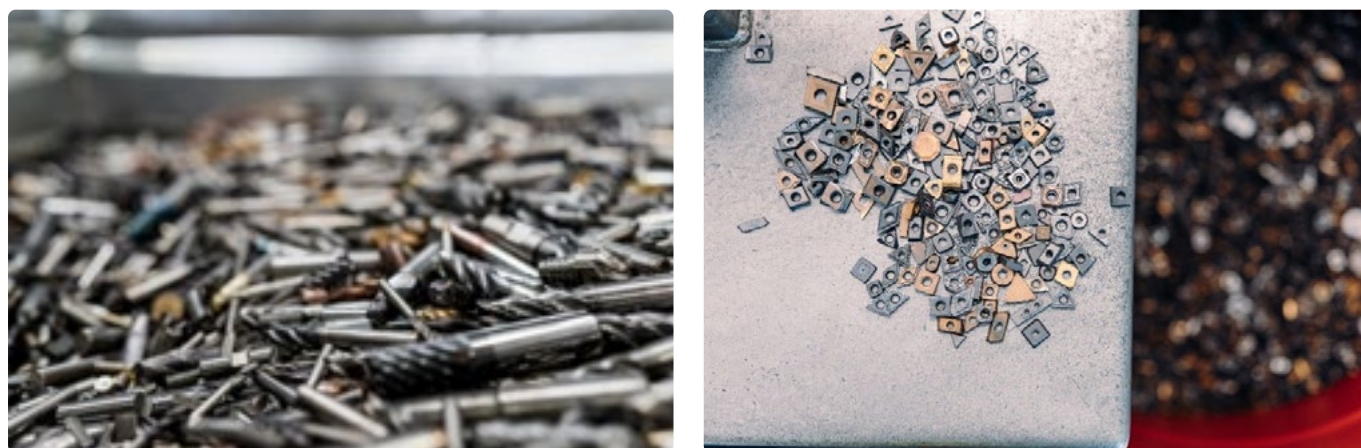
| Image courtesy of Stadler Metalle GmbH & Co. KG
